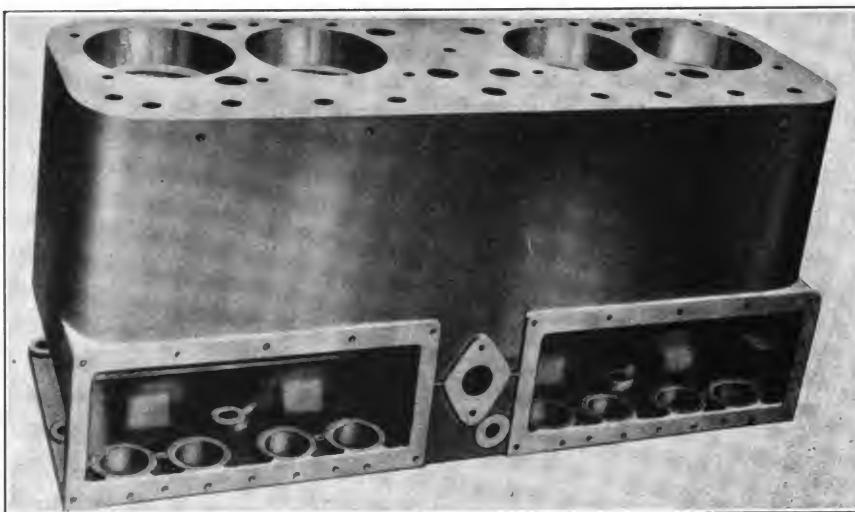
Detail of cylinder block—openings near bottom are for valve plates
